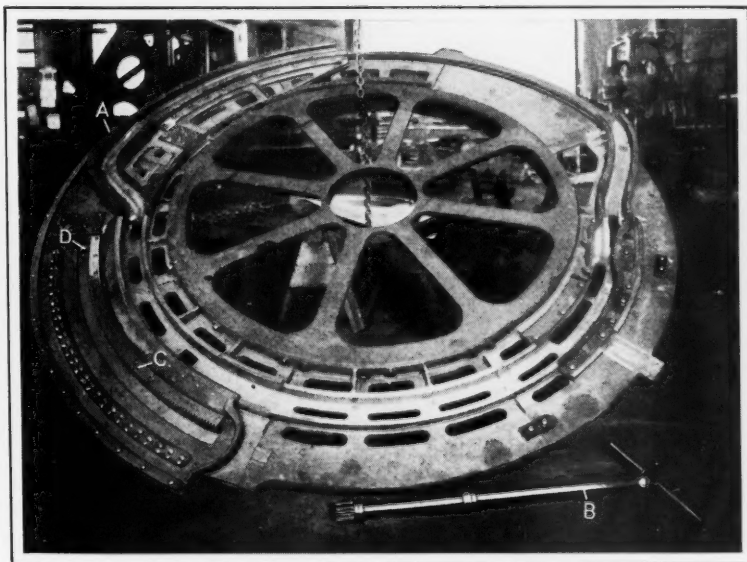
Large Face Cam Having an Adjustable Path that may be Shifted to Change the Timing of a Machine
